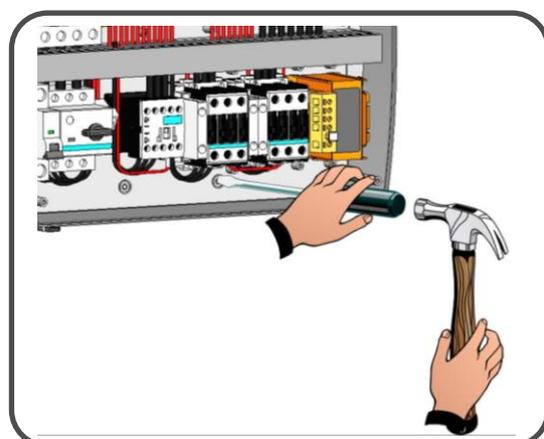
Using the supplied drilling template sheet, make the four fixing holes on the wall.
